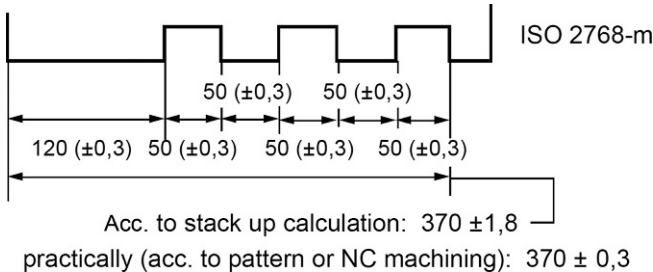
Tolerance accumulation with chain dimensioning
